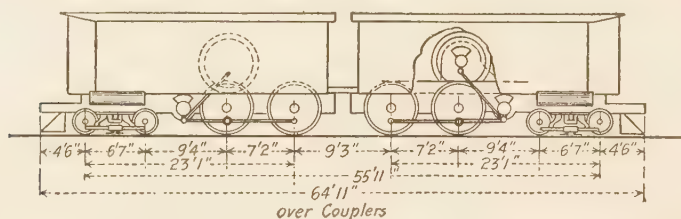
2-B+B-2 geared locomotive, Pennsylvania Railroad.
